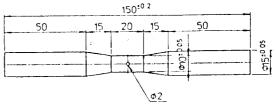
Configuration of fatigue test specimen Center holed specimen in mm
